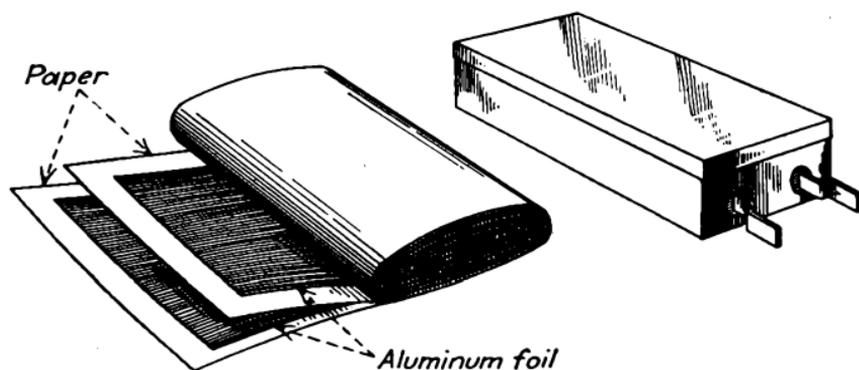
Method of making electric condenser from sheets of aluminum foil and waxed paper.
